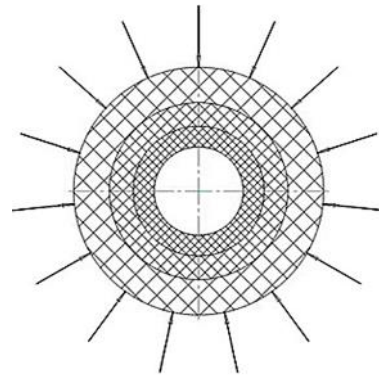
Scheme of pressing using an elastic insert formed in a set of inner folded inserts
